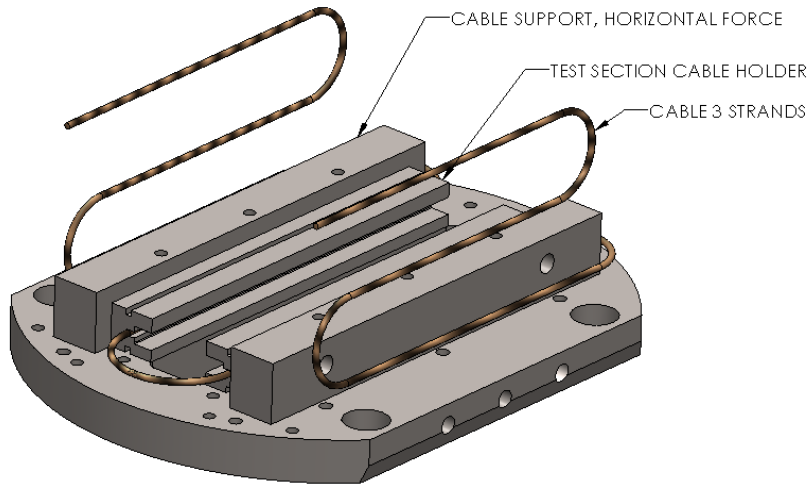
Preparing the cable for the assembly by bending it into its final shape
